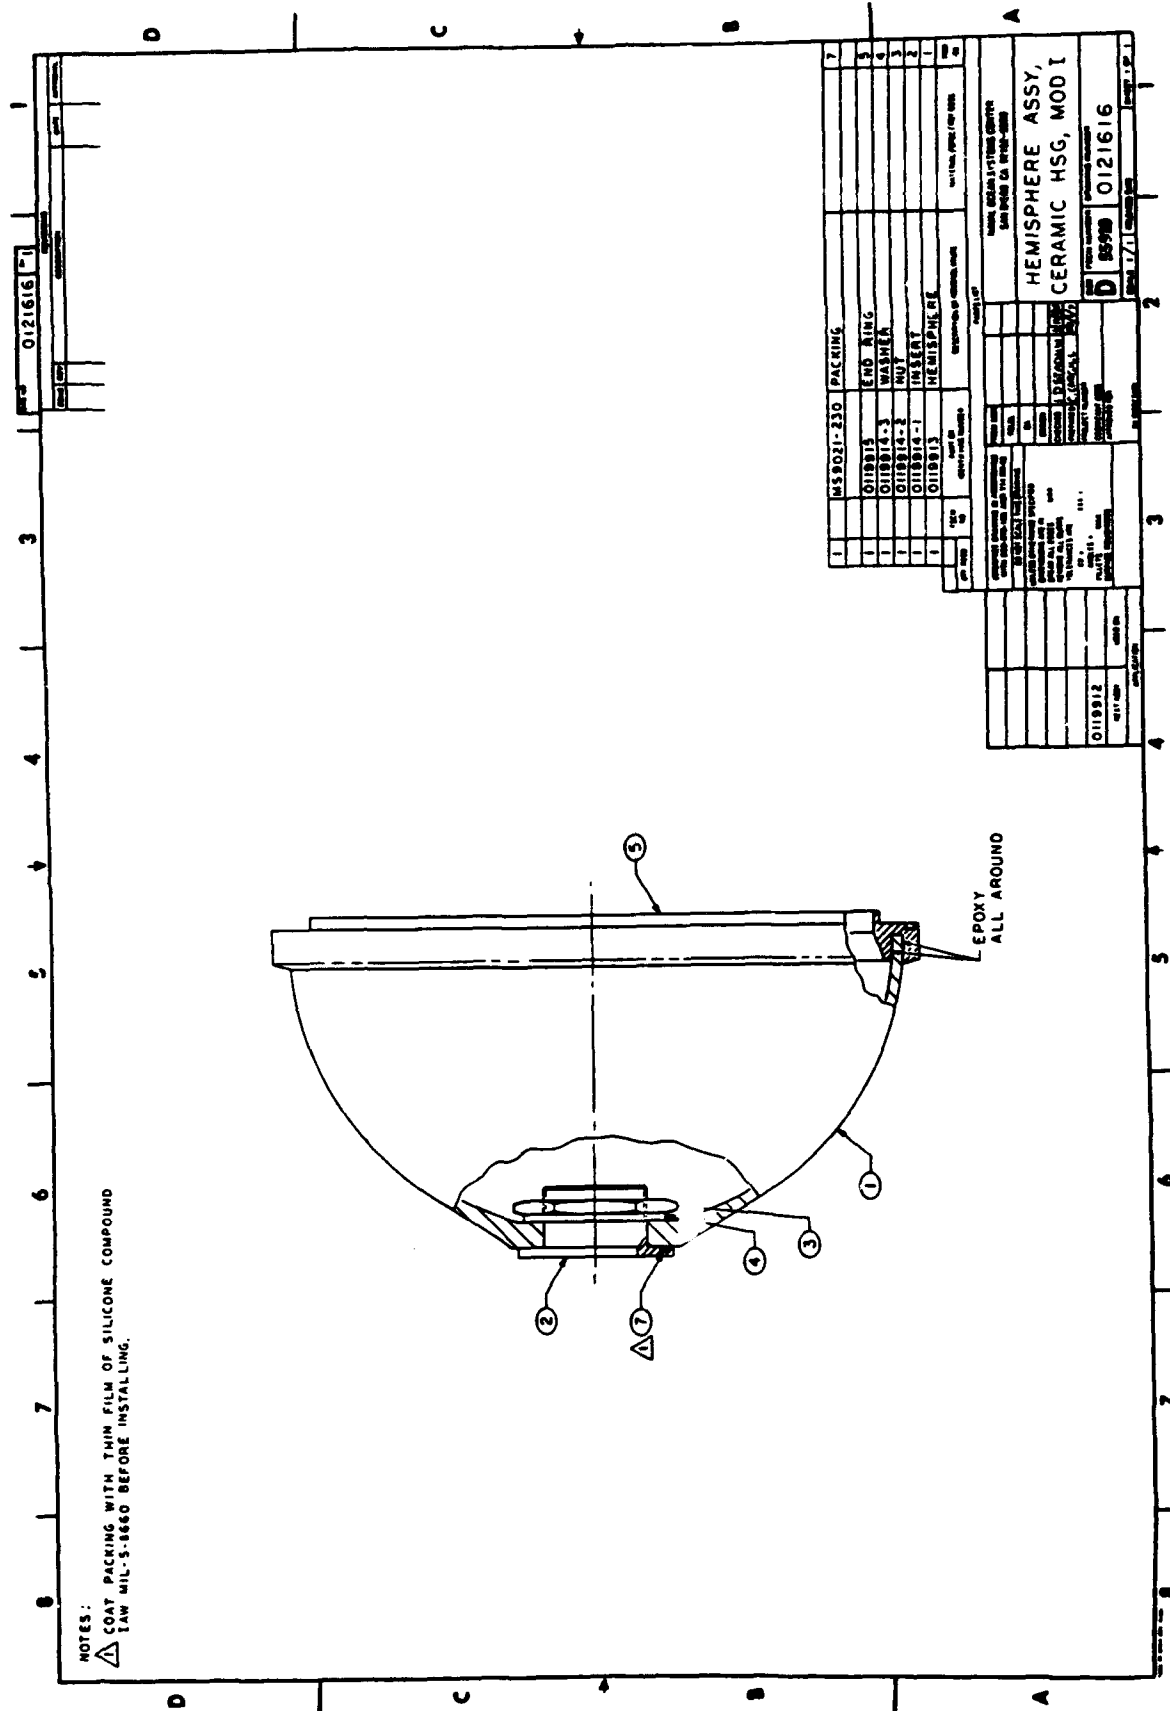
12-inch-diameter hemispherical ceramic housing section equipped with Mod 1 end ring.
